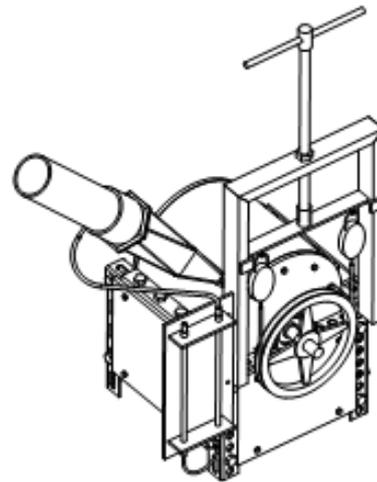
Assembling design of CROSSHAT Testing Turbine Performance.
